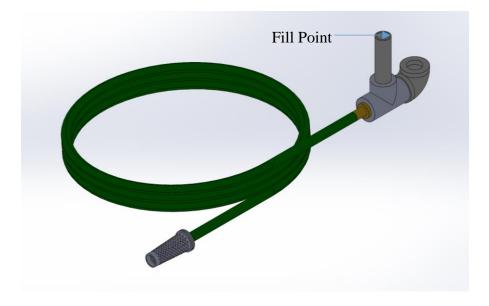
Surface Pump Assembly CAD with Fill Point called out
